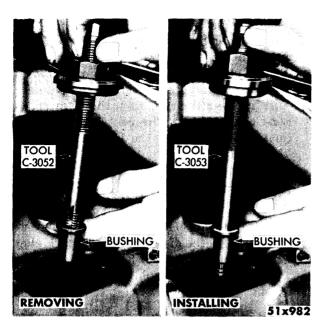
Removing and Installing Distributor Drive Shaft Bushing
